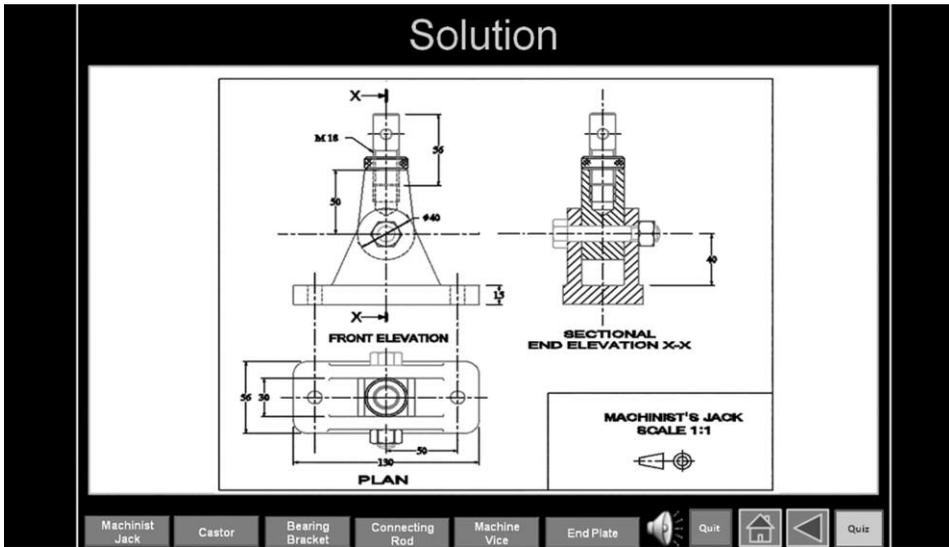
Shows a view of the Machinist's Jack sectional assembly drawing
